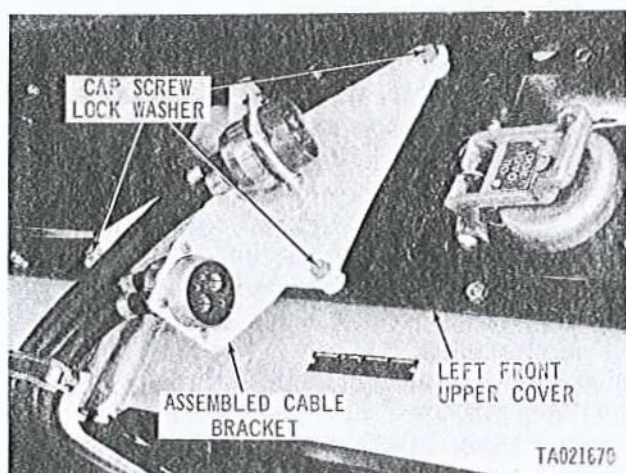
Removing or installing left wiring harness cable bracket, model AVDS-1790-2C and AVDS-1790-2D early engines.
